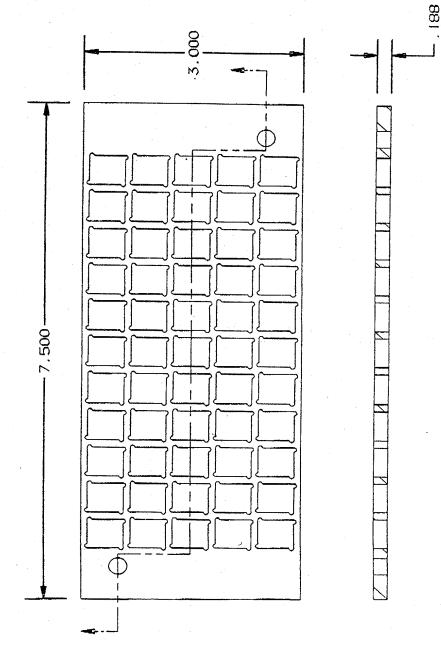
Lid seal plate design for ceramic BGA packages. The lid seal plate is used for the high volume method of die attach, lid seal and ball attach. The mating carrier plate is shown in Figure 12.
